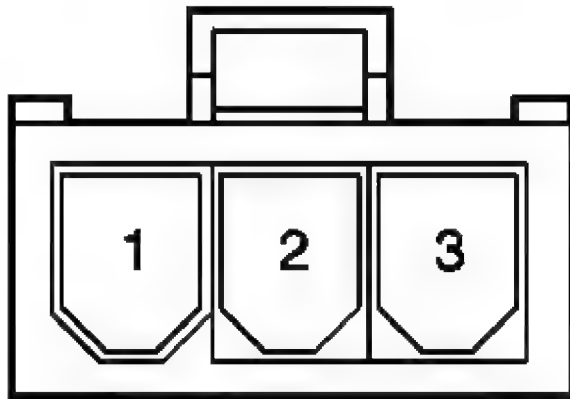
Driver Seat Recline Motor C2 (AE8, A45) Connector End View
